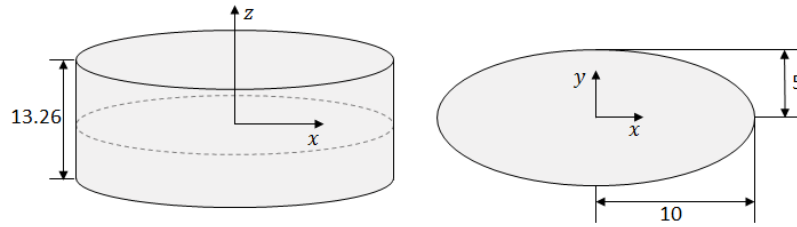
Geometry and dimensions in mm of the elliptical cross section specimen.
